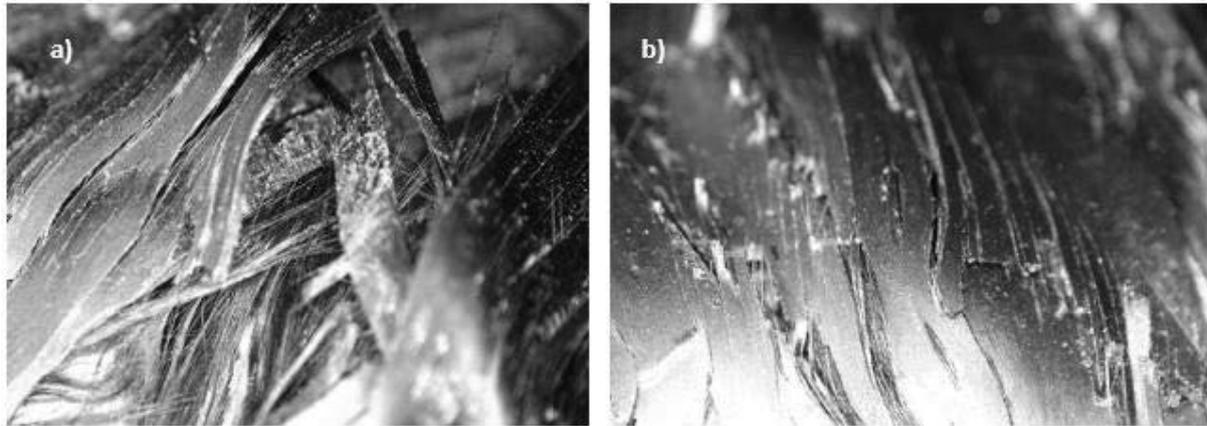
The found typical failures of parts in bending test explored for the a) wrapped b) winded, parts
